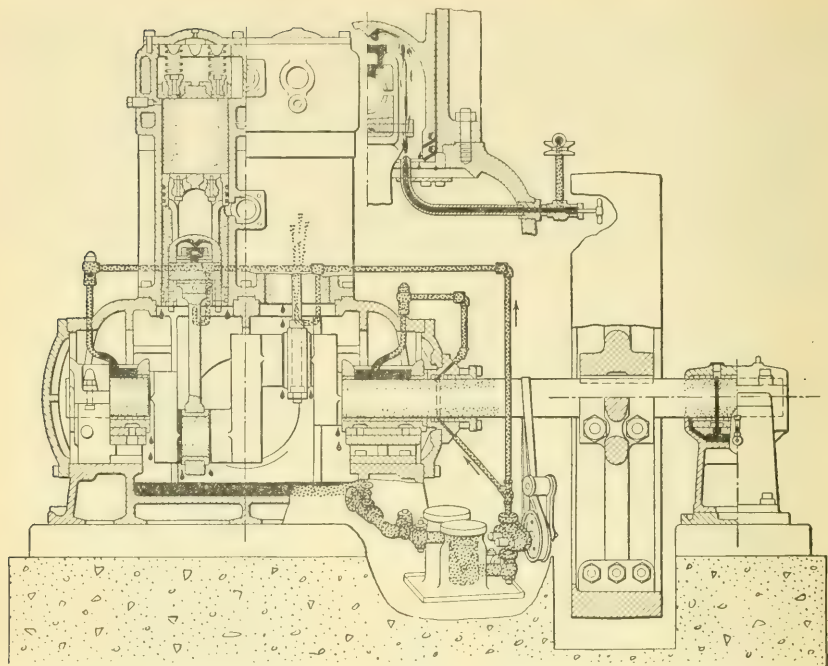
Lubrication; the Large, Enclosed-type, Ammonia Compressor.
